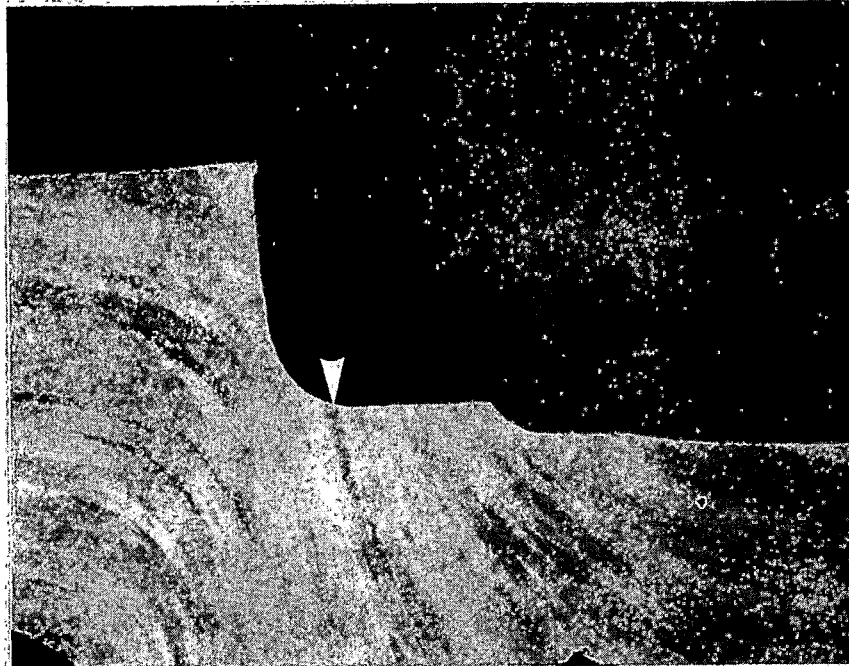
AN ETCHED MACROSECTION CUT THROUGH THE UNBROKEN LEFT WING LOWER OUTBOARD ATTACHMENT FITTING SHOWING THE INTERNAL GRAIN FLOW. NOTE THAT THE GRAIN FLOW IS NEARLY PERPENDICULAR TO THE MACHINED NUT RECESS SURFACE AT THE ARROWED LOCATION. THIS CORRESPONDS TO THE LOCATION OF THE PRECRACK ORIGIN IN THE FAILED RIGHT WING FITTING.
